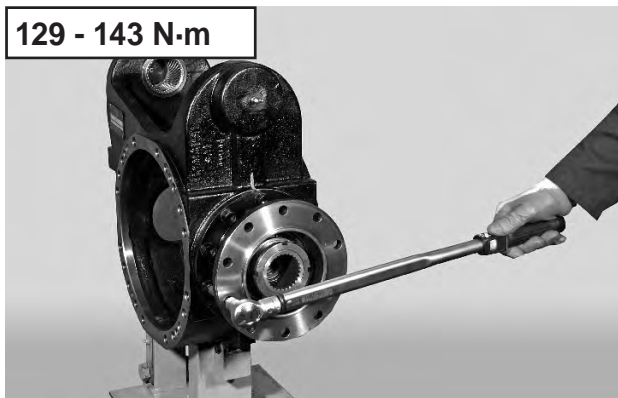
Using the criss-cross method tighten to torque of 129 - 143 N·m.
